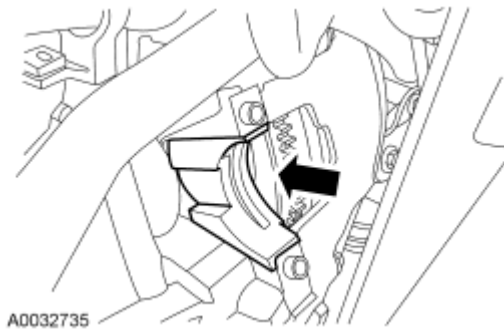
Locating Transmission-To-Engine Bolts
